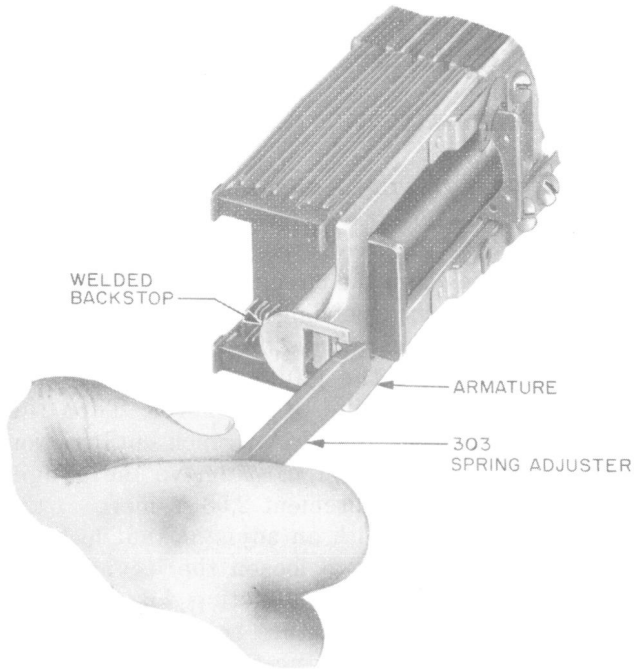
A—Relay Having 0.032-Inch Thick Welded Backstop
